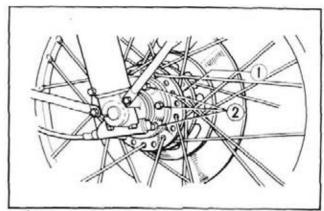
(1) Front wheel hub (2) Disc plate mounting bolts
